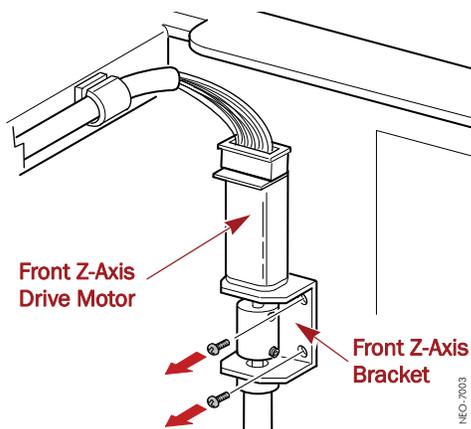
Remove Front Z-Axis Bracket Screws (Inside View)
